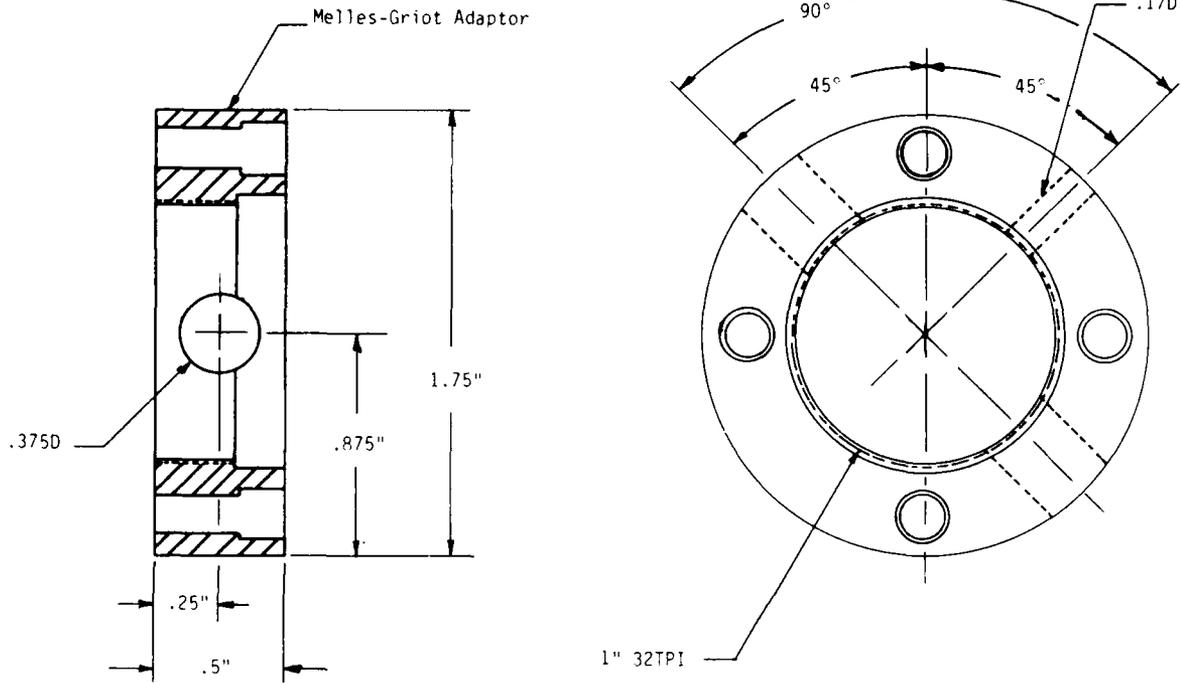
Modifications to the Melles-Griot adaptor; unless otherwise specified, tolerances are  $\pm .005$
